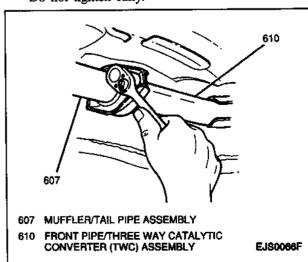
Removing Front Pipe/Three Way Catalytic Convertor (TWC) Assembly from Muffler/Tail Pipe Assembly
